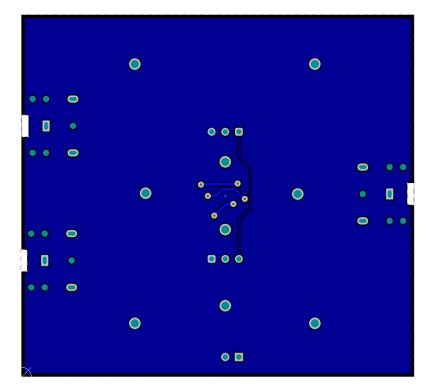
TMUX2889YBHEVM Bottom Layer Layout
